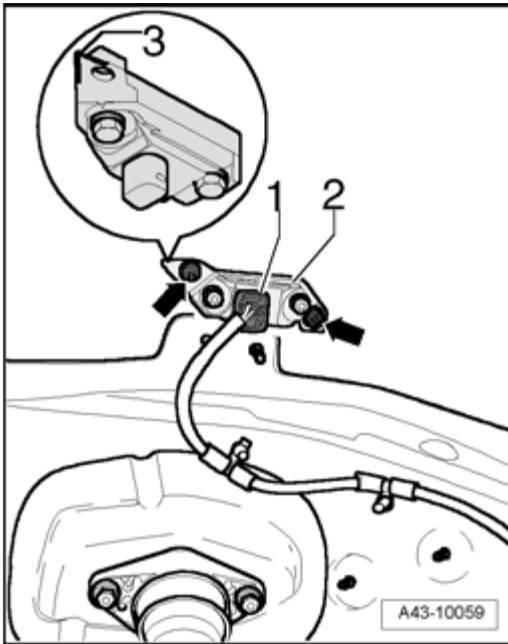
Identifying Connector, Nuts, And Rear Body Acceleration Sensor G343
